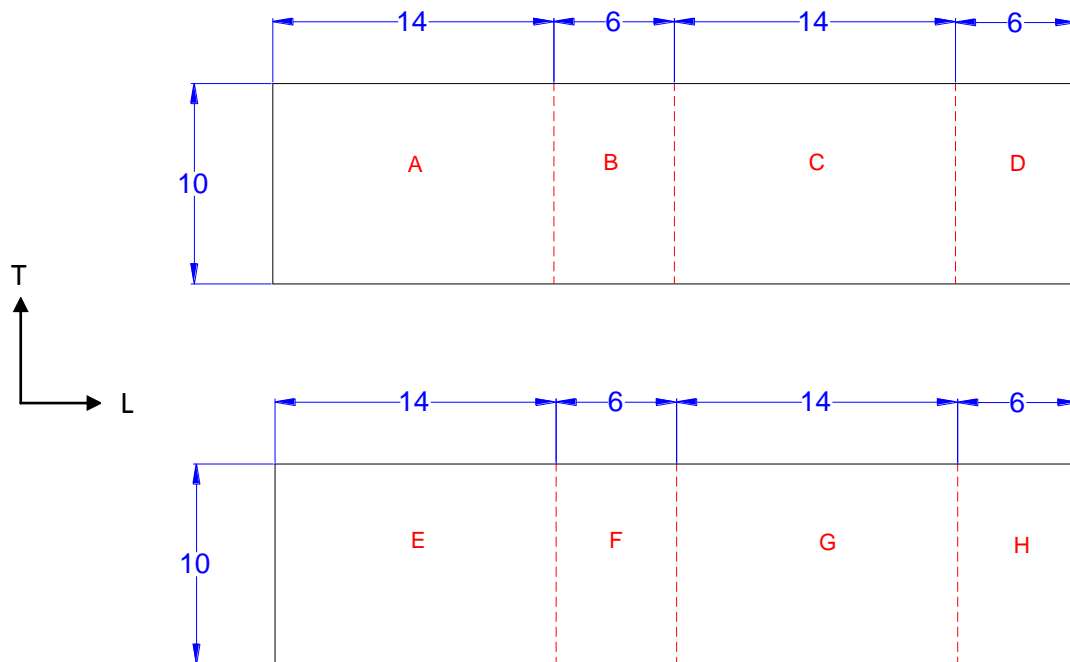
Ti-6Al-4V billet (#K27P) indicating dimensions, orientations, and sectioning plan prior to specimen extraction
